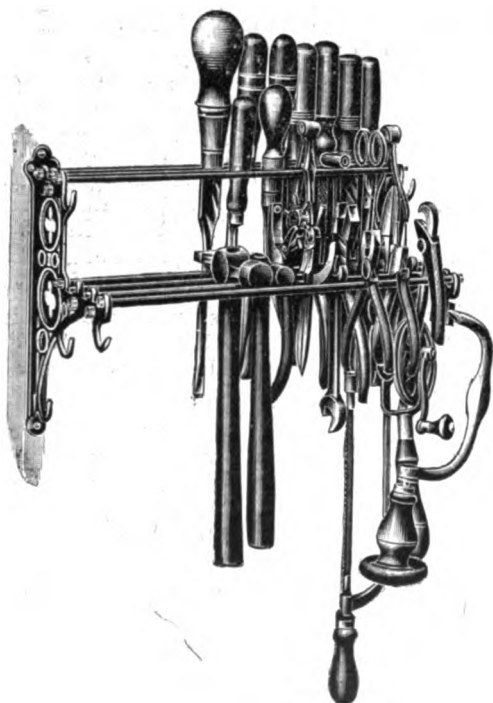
The "Ideal" Adjustable Tool Holder.
